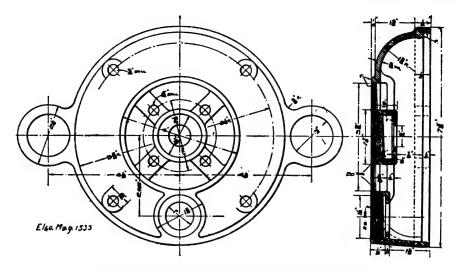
DETAILS OF MOTOR COVER, PLATE. AND BEARING BOSSES.
